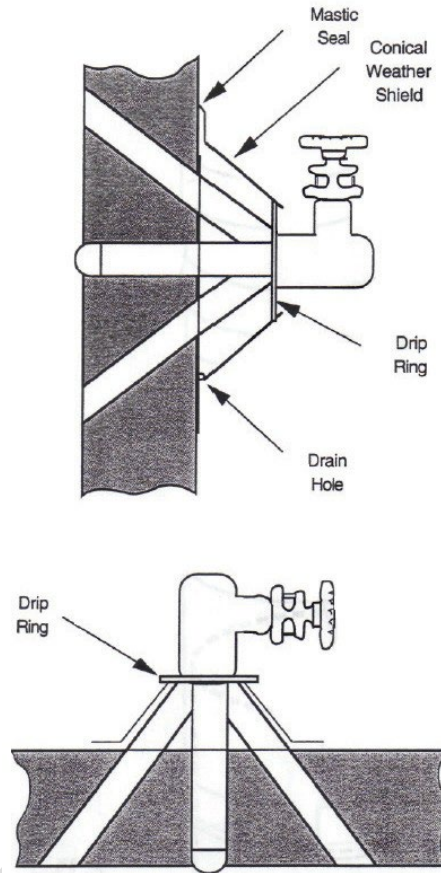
Method of Avoiding Water Buildup for Horizontal and Vertical Gussets
